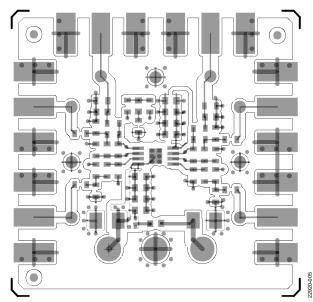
EVAL-LTC6229MS8E Layout Pattern, Primary Side
